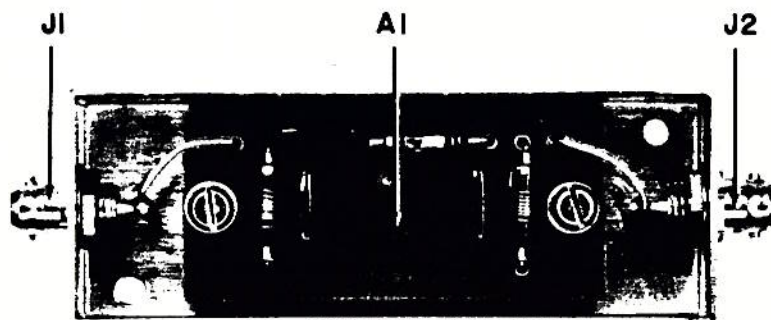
Type 79313 Bandpass Filter Assembly, Component Locations
